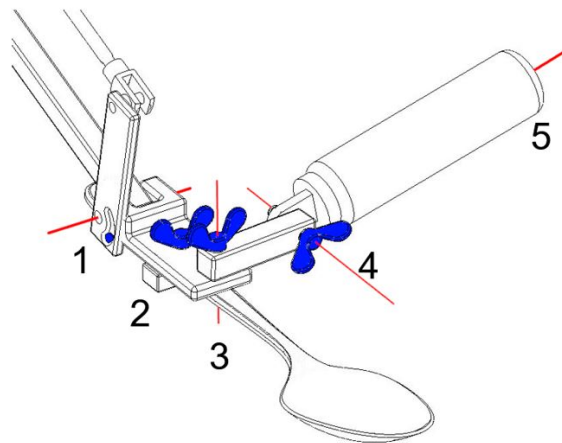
Close-up view of the handle and spoon holder. The tilt adjustment screw is shown in 1. The second screw is the spoon fixation. The adjustment screw in 3 allows the side the handle is on to be changed for right- or left-handed users. The fourth screw changes the elevation angle of the handle. Axis 5 shows the rotation axis of the handle.
